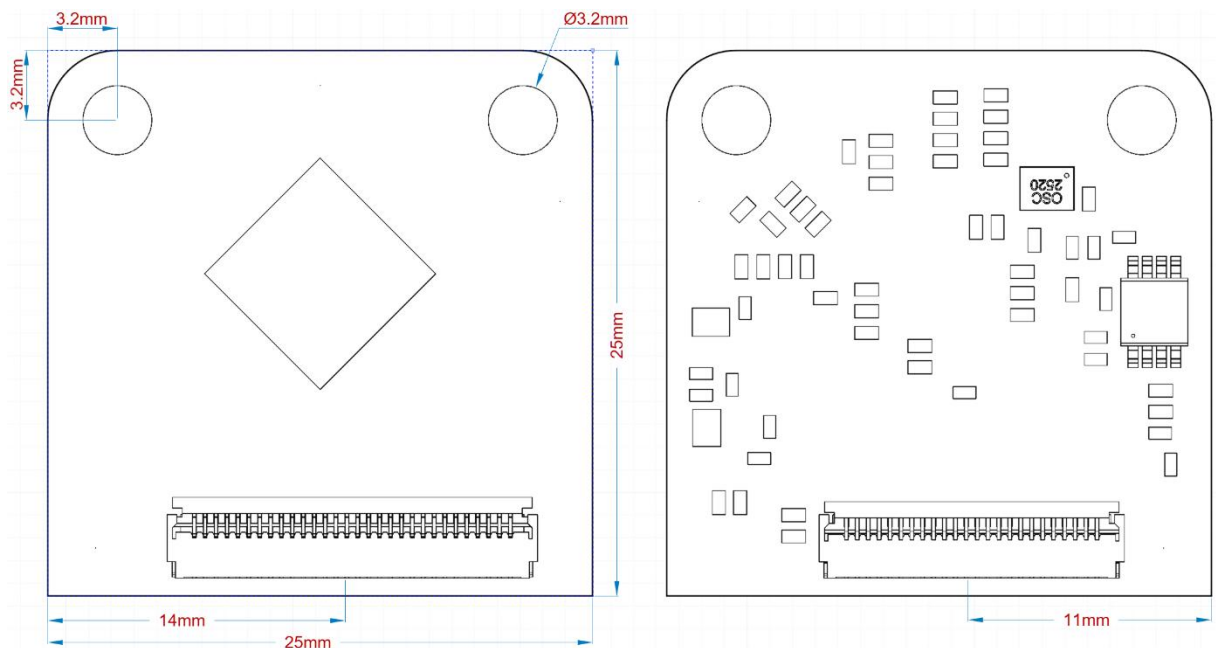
DSI to HDMI Adapter Dimensions – Top and Bottom Sides
